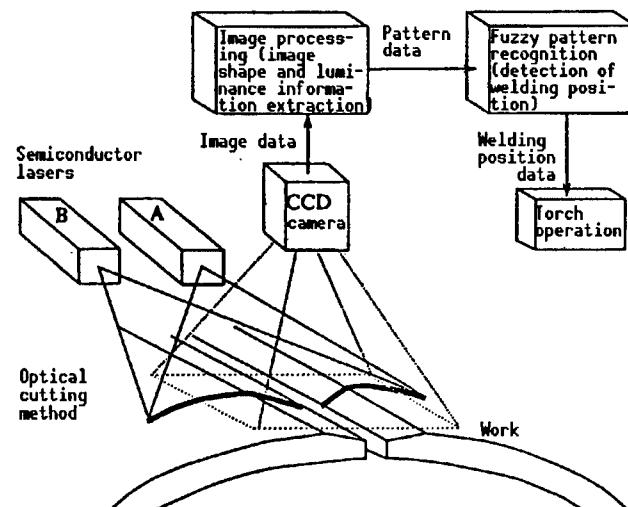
(2).4. Outline of Laser Welding Bevel Sensor (By Sameda, et al.⁸)
